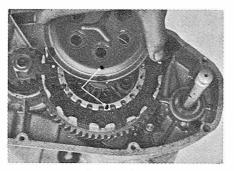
View of alignment marks on pressure plate and hub.
